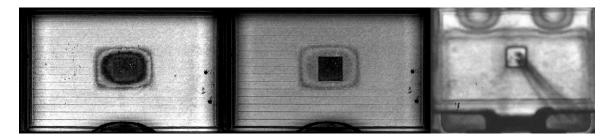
SAM images of a C2M1000170D SiC MOSFET. From left to right: System solder of die-attach, chip die structure, and bond wires attached to the top of the chip die.
